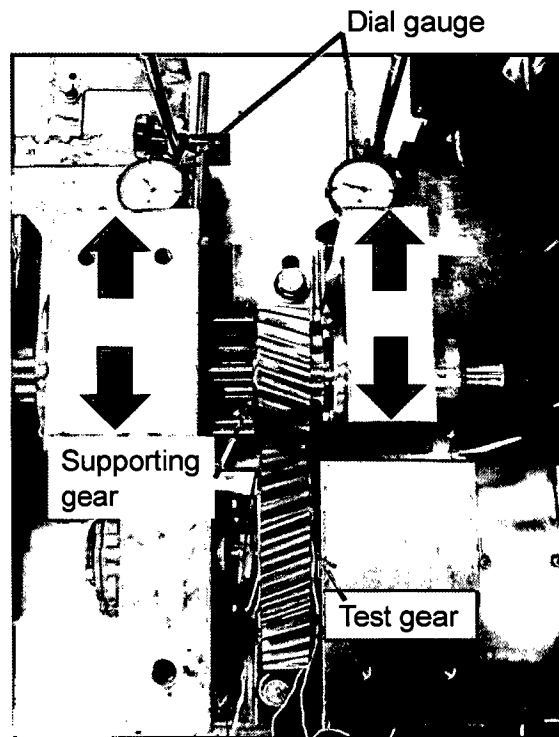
Photograph of tooth bearing by means of root stresses measurement of Part P0 (Solid gear)
